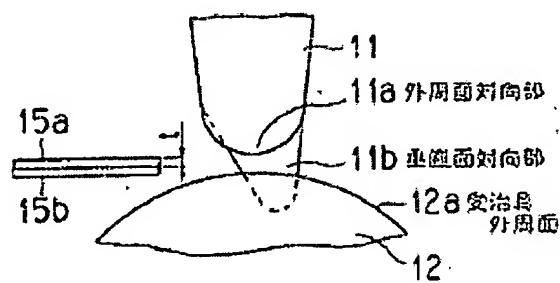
Model Enlarged Side View Diagram of an Essential Section that Shows the Welding and Cutting Position of a Sheet in an Example
